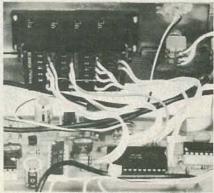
SWITCHES AND CONTROL BOARD mounted in case. Usefulness of ribbon cable is obvious
